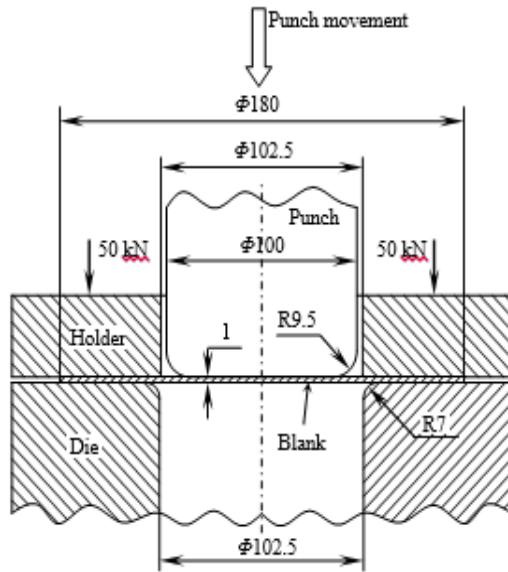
Tooling setup for cylindrical cup drawing in NUMISHEET'2002 (unit: mm)
